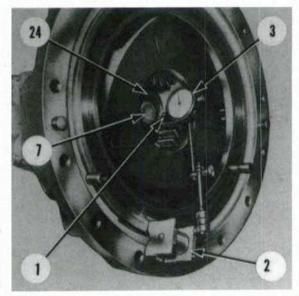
Axle shaft end play can be checked using a dial indicator as shown.
